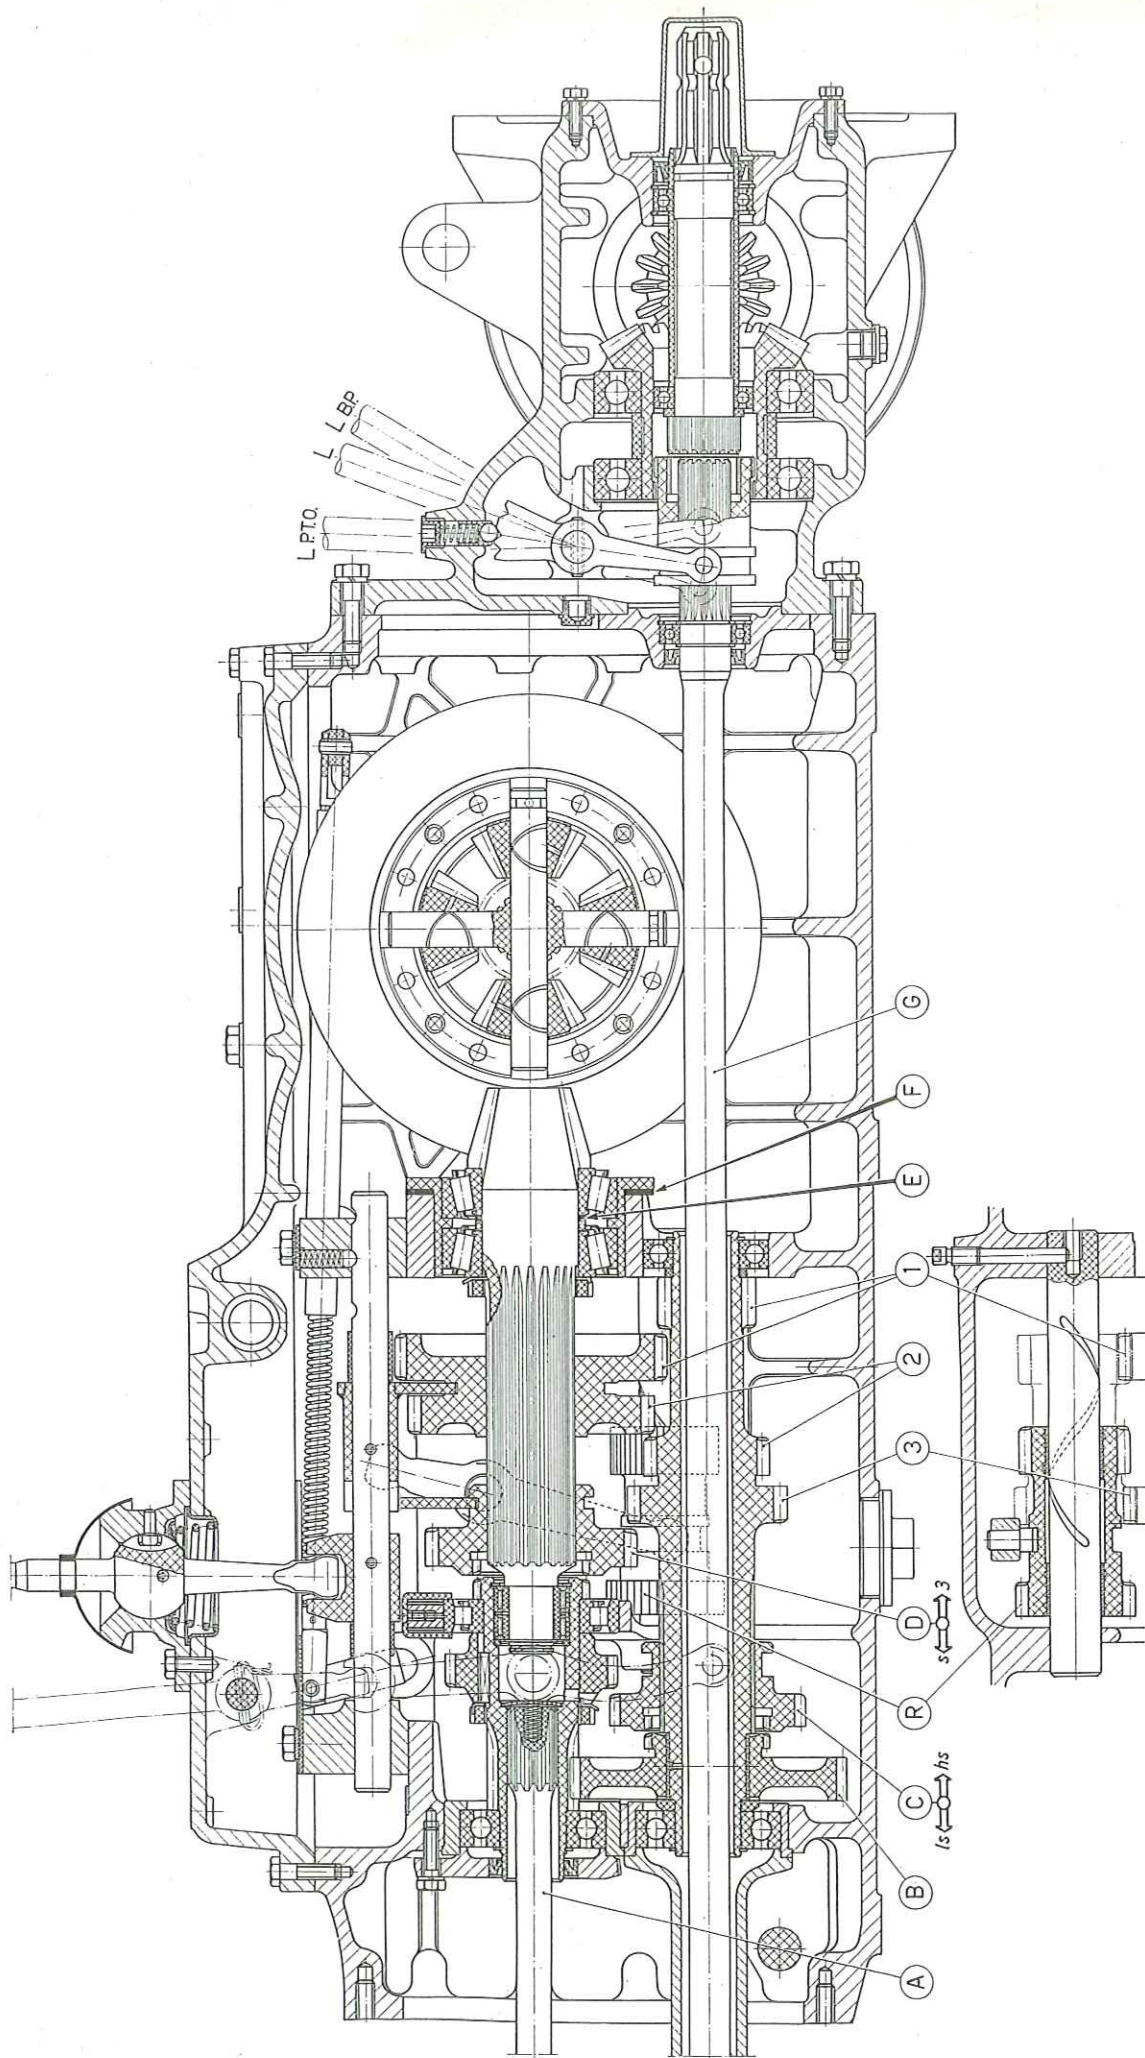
Longitudinal section of gearbox, bevel pinion and P.T.-O. unit.
